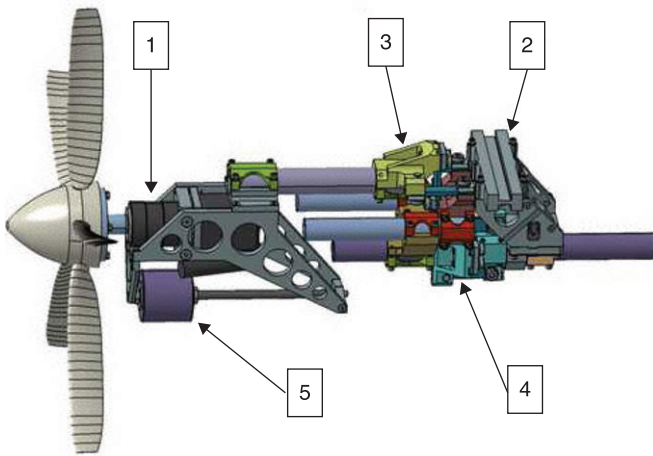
W-WING demonstrator nacelle design drawing (1 – motor and gearbox; 2 – wing spar; 3 – pitch attachment; 4 – yaw attachment; 5 – mass balancing weight)
